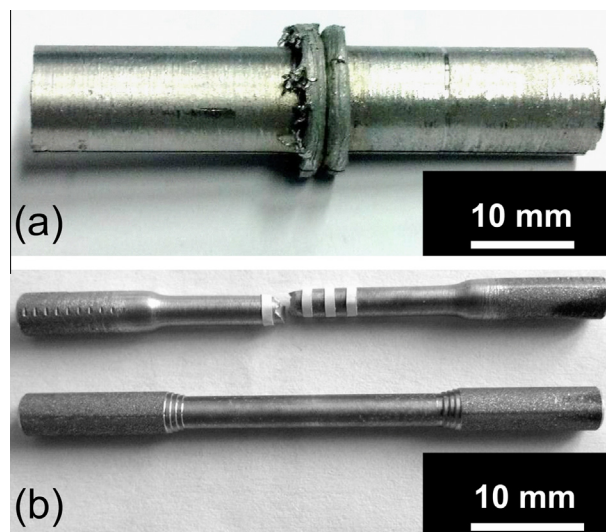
(a) Typical image of a friction welded Al–12Si joint with symmetrical and smooth flash at the joint. (b) Examples of tensile specimens machined from the welded samples.
